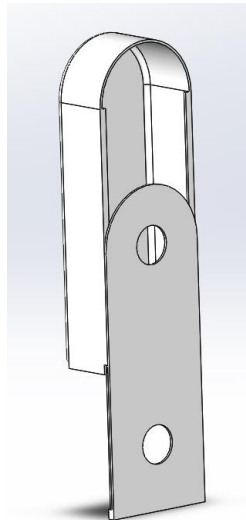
PHP casing top piece sliding onto the casing back piece
